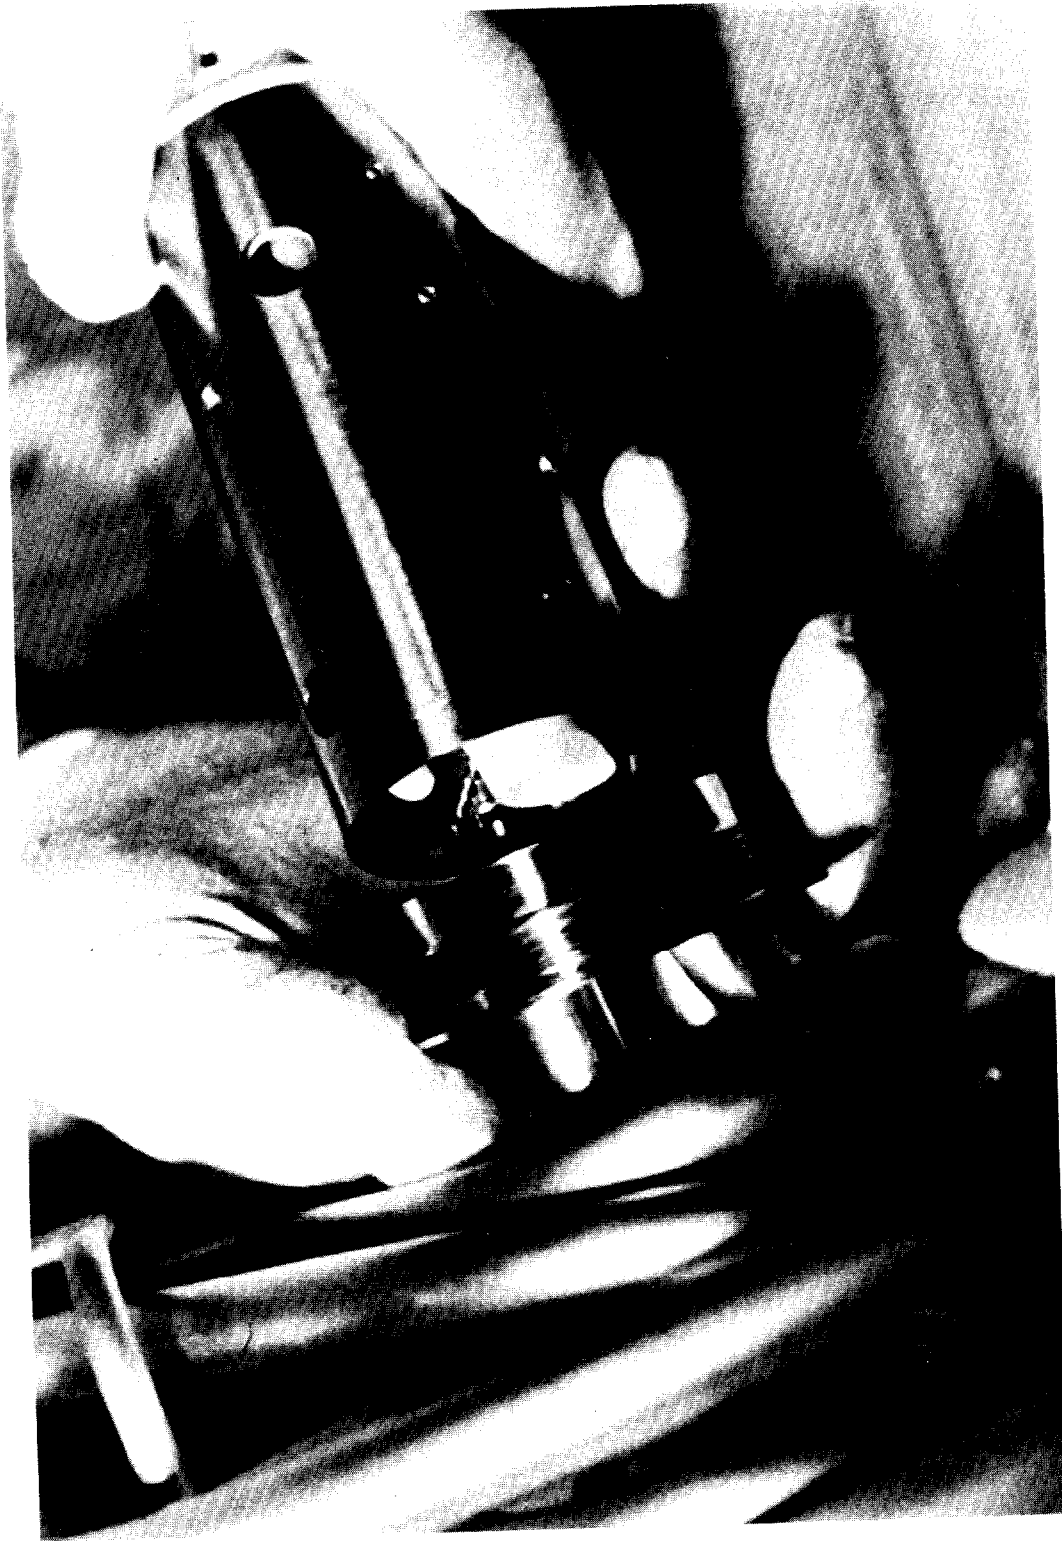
Final mating of quantity probe and tank adapter.
